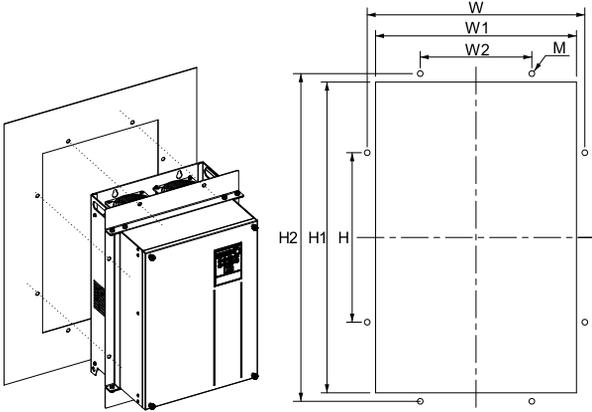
Midsection Mounting Dimensions for Frames E/F/G
